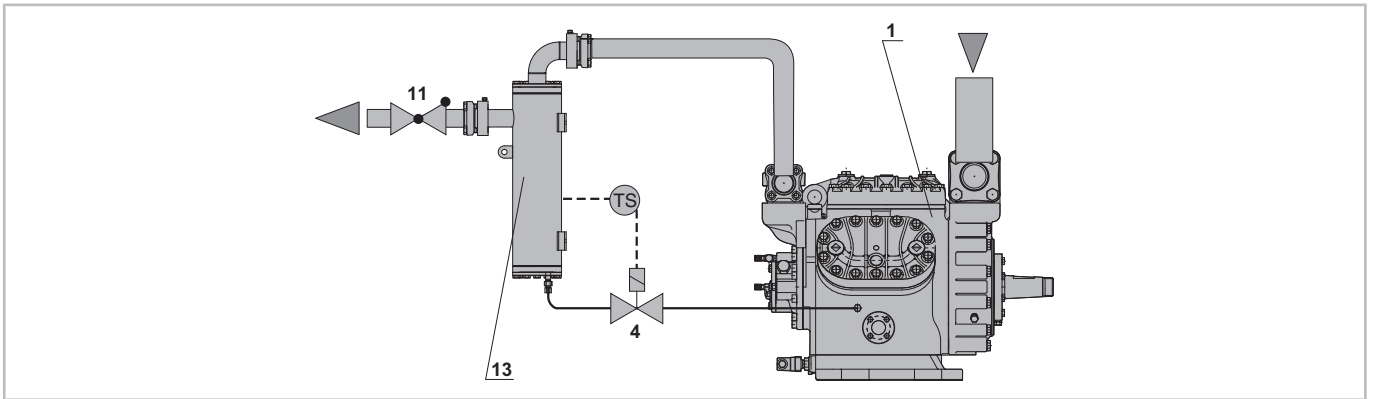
Oil circuit for open drive reciprocating compressors: W6.A-K
